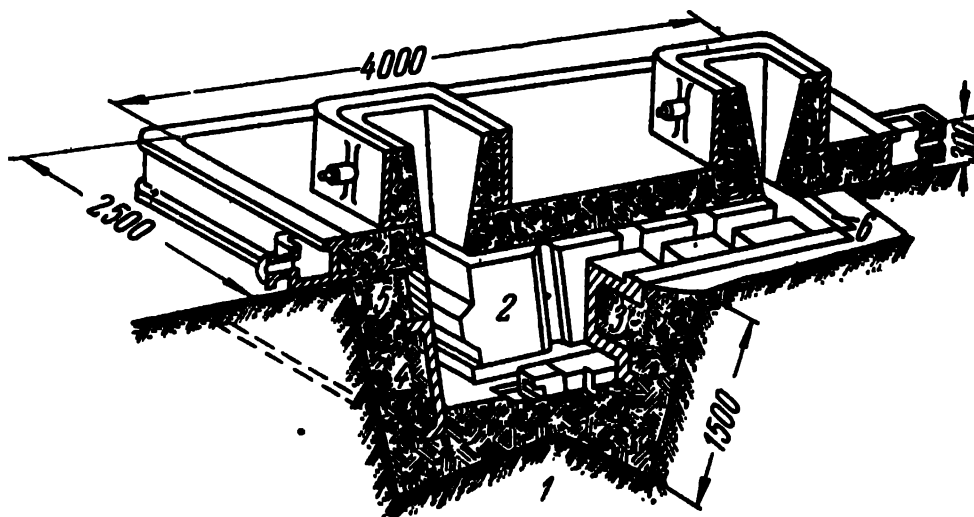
Mould for a die bedplate with shell cores and inserts (Kestel):
